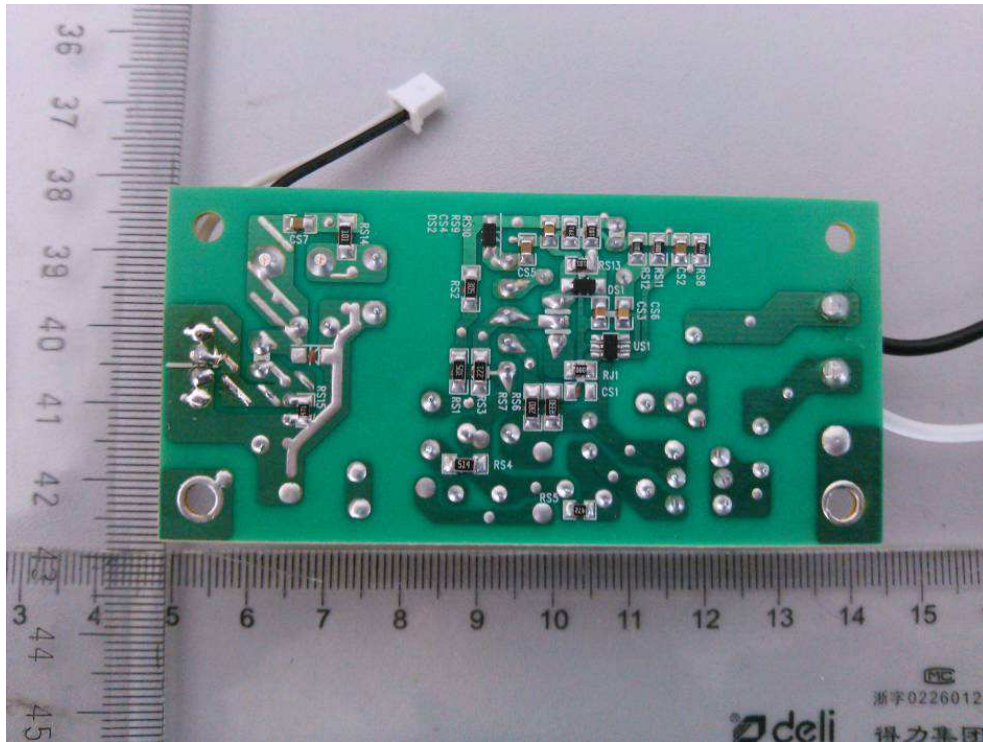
EXTERNAL VIEW - 1 OF MODEL GT-41134-0606-W2-TAB
